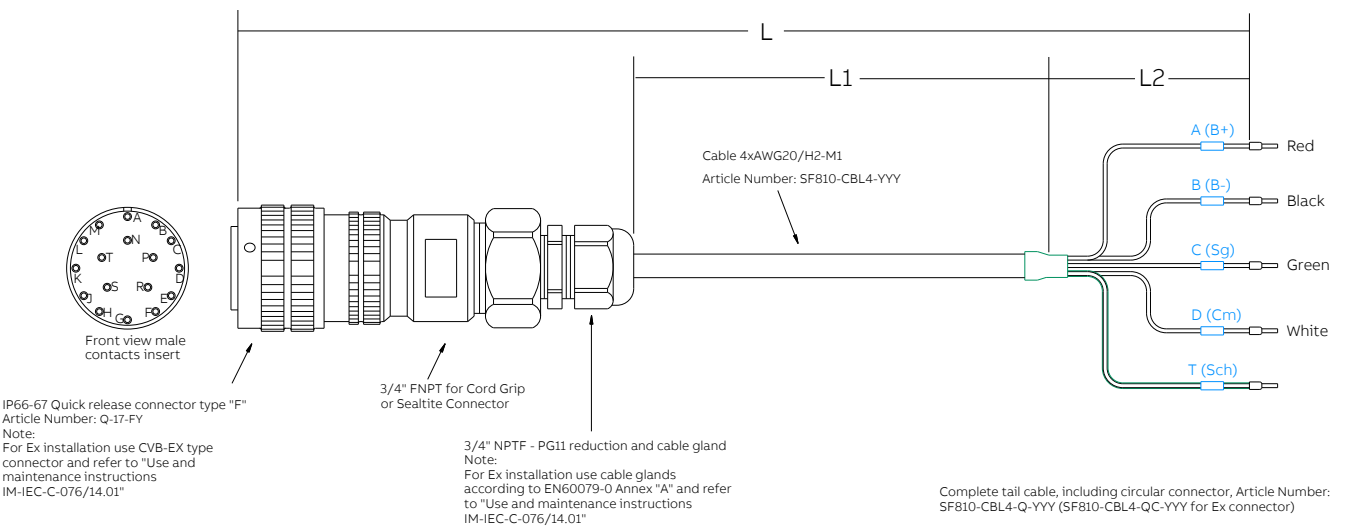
Single sensor connector pin assignment with standard ABB cable.
